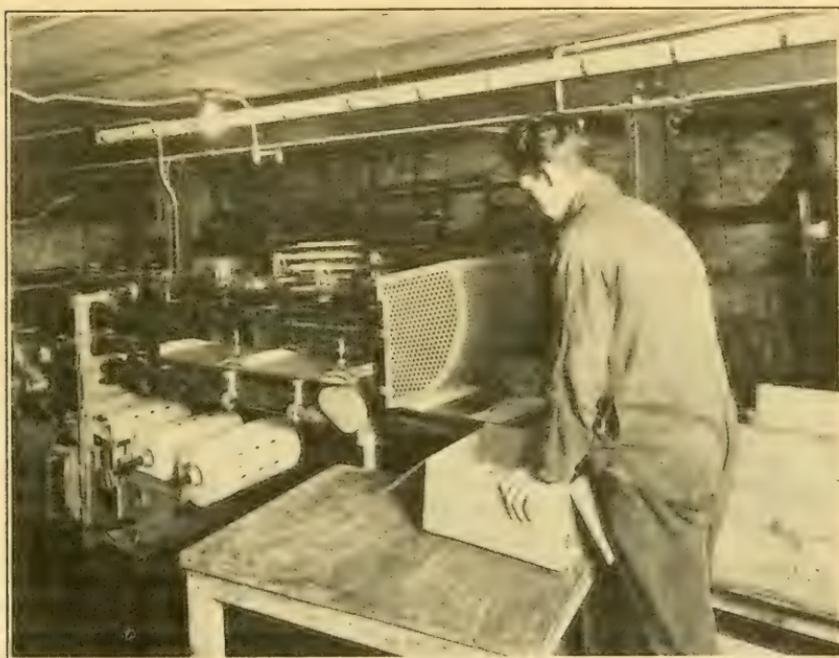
Wrapping machine for single frozen fillets. Courtesy, Atlantic Coast Fisheries Co.
